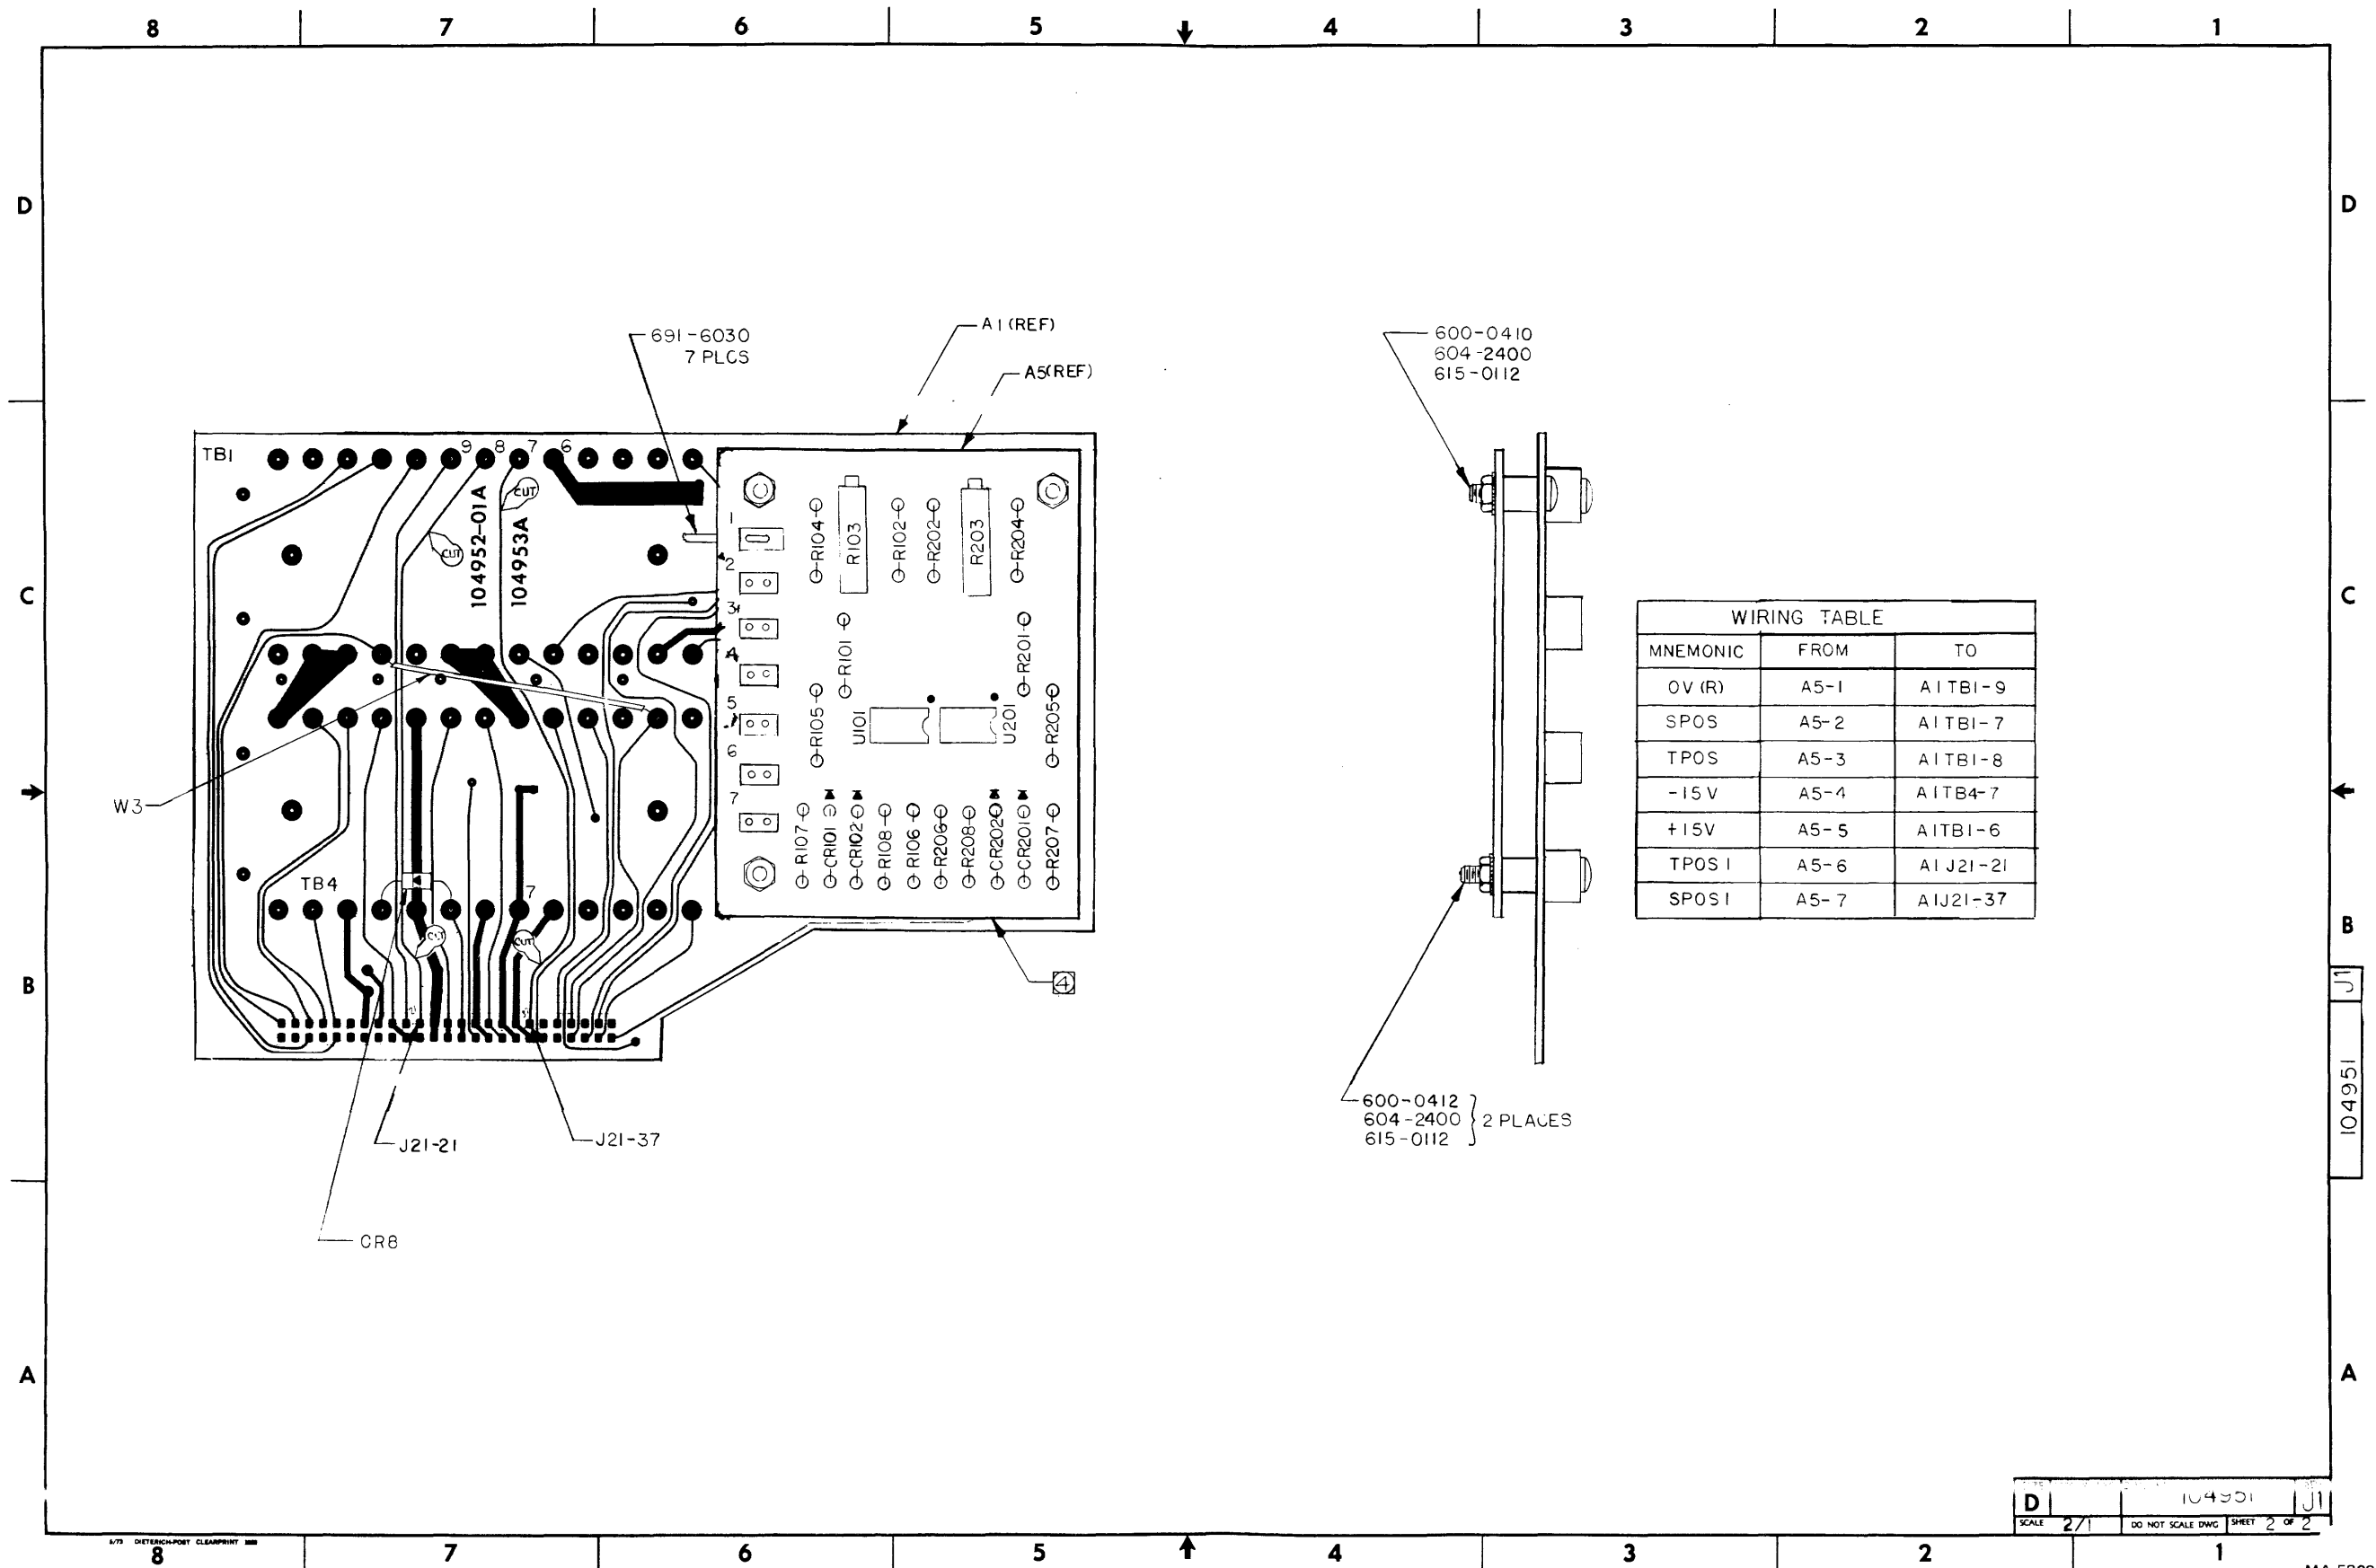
PCBA, Interconnect F (Sheet 2 of 2)
